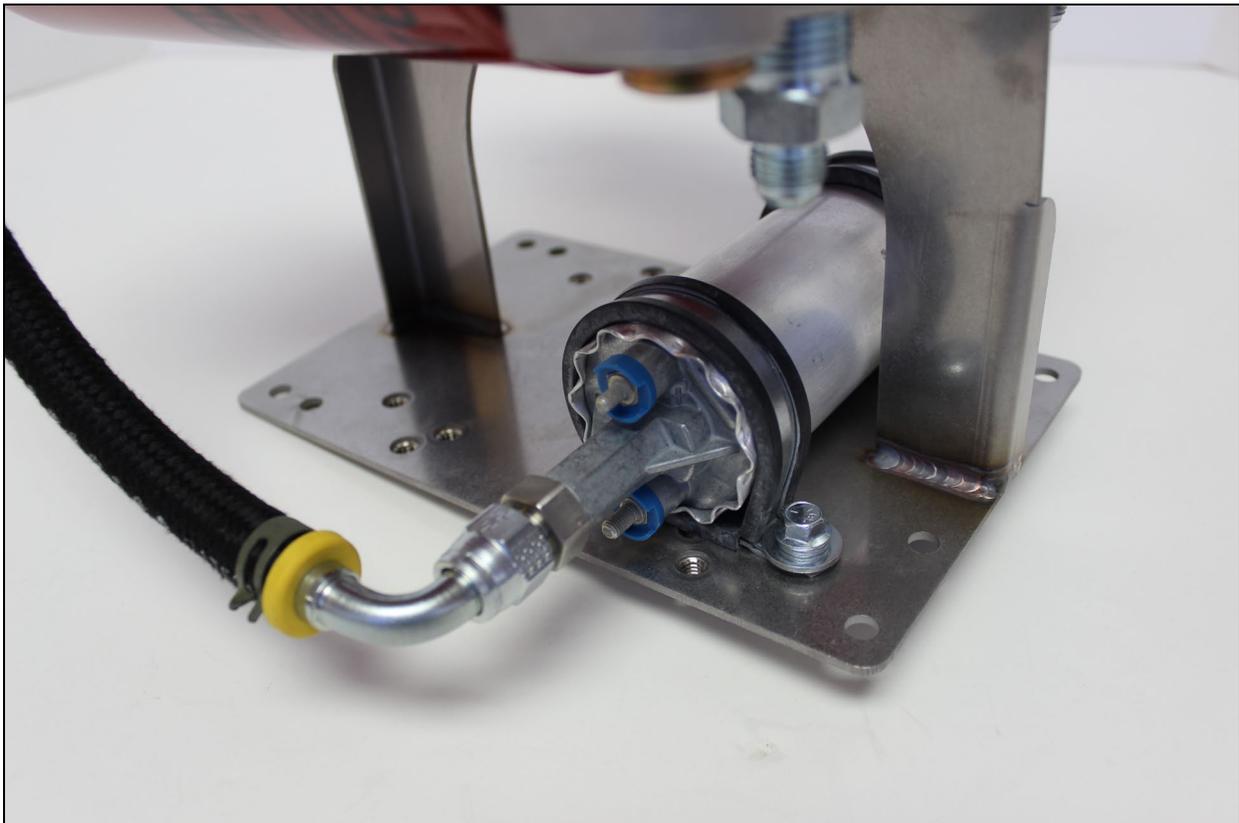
FUEL PUMP MOUNTING & FUEL OUTLET HOSE CONNECTION
